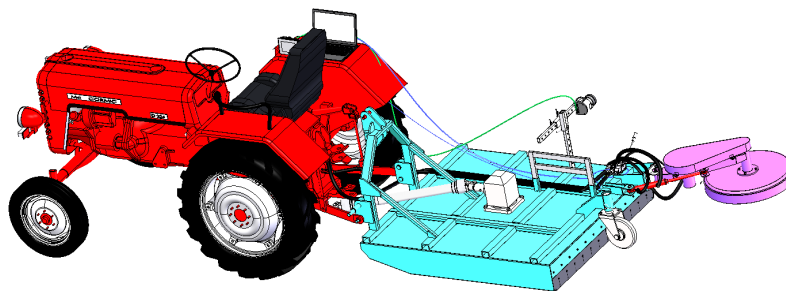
Technical equipment for cutting grass in aggregate with the tractor
